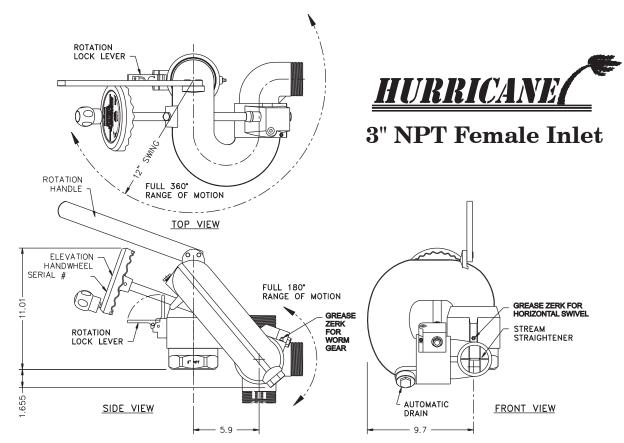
C Hurricane Fixed Monitor Overall Dimensions w/3" NPT Female Inlet
